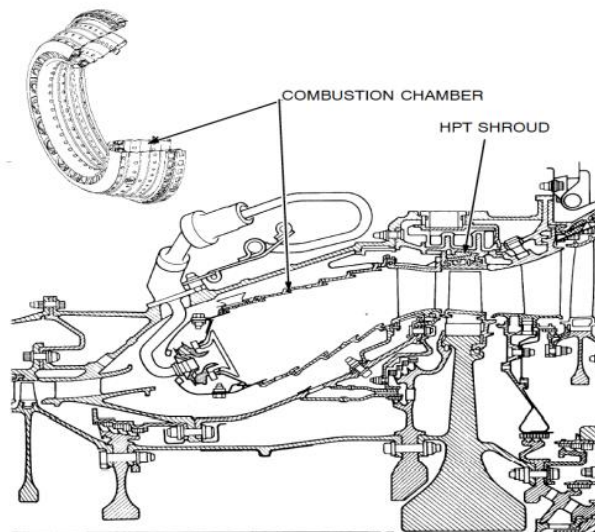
Cut-view of the CFM56-3 combustor [65].
